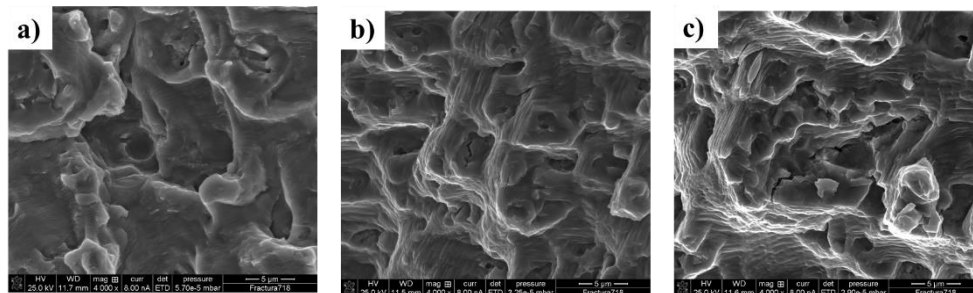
Fatigue fracture surface of ERNiFeCr-2 welds.
